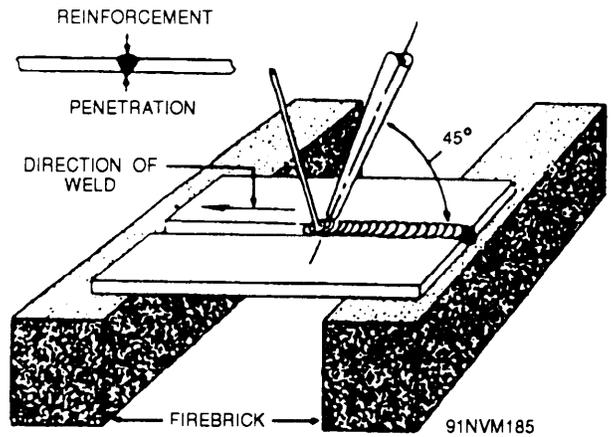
Welding a butt joint in the flat position.
